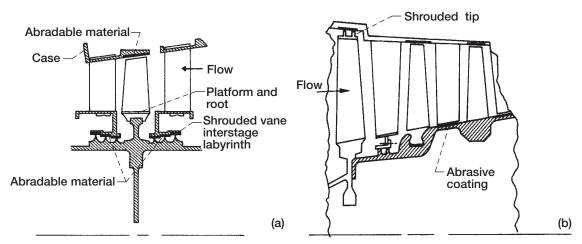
Compressor sealing locations. (a) Blade tip and interstage. (b) Drum rotor. (Ludwig, 1978.)
